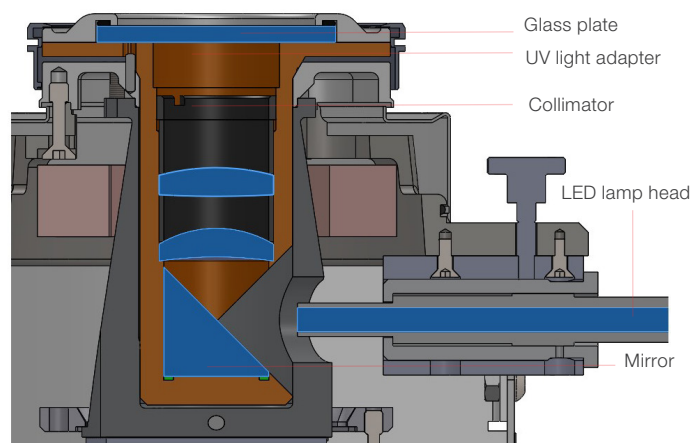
Schematic drawing of the universal Peltier temperature module with the UV adapter.
